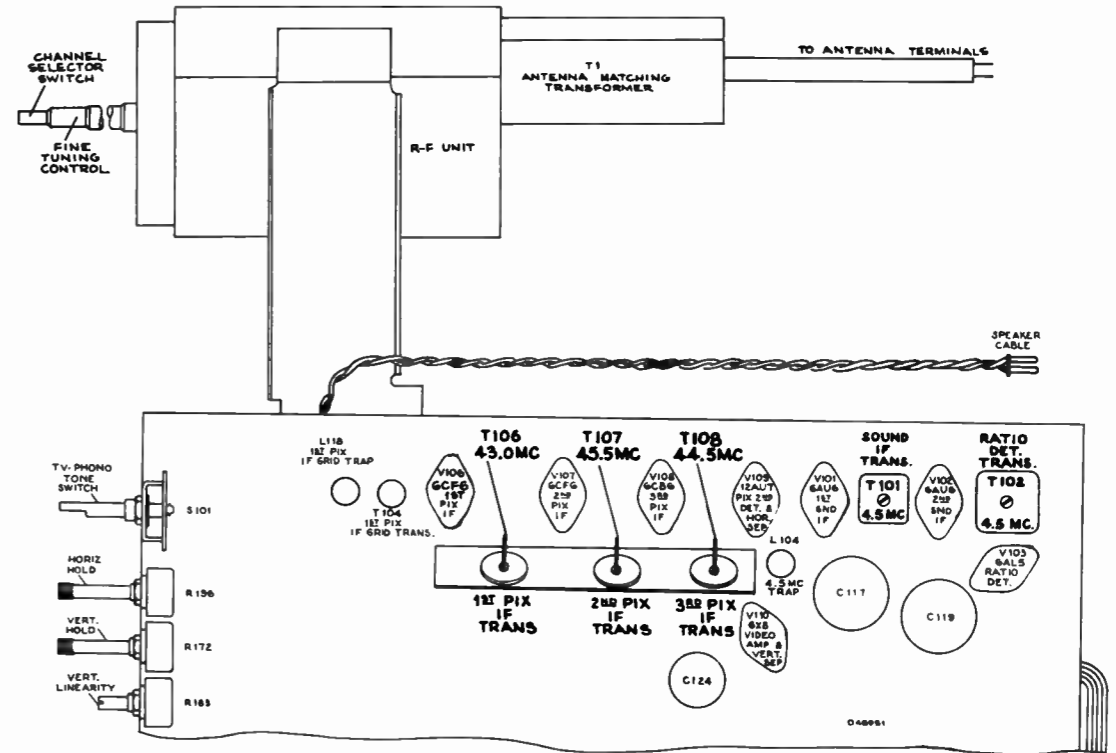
Bottom Chassis Adjustments (KRK22C Tuner Shown)
